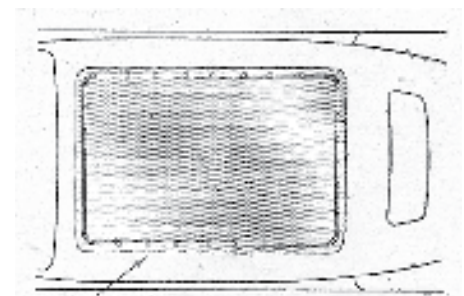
Second stage of fixing topping material. A series of pegs into position prior to the fitting of sealing strip.
